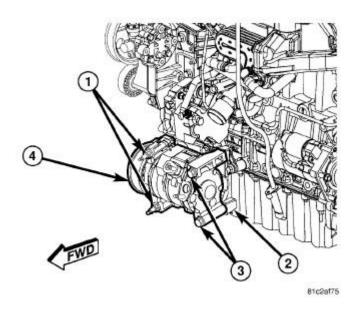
A/C Compressor To Mount 2.8L Courtesy of CHRYSLER LLC
